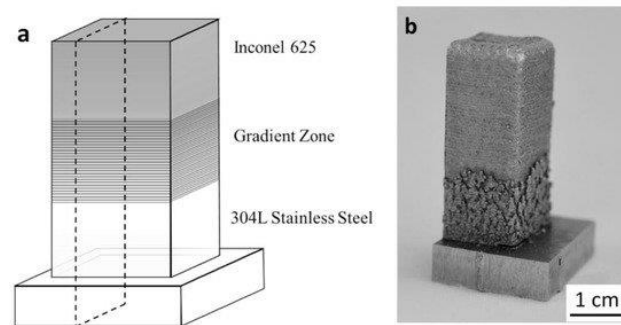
(a) Schematic of Inconel 625/304L stainless steel FGM. (b) Image of an Inconel 625/304L stainless steel FGM sample fabricated by DED [61]. (Reproduced with permission from Elsevier).
